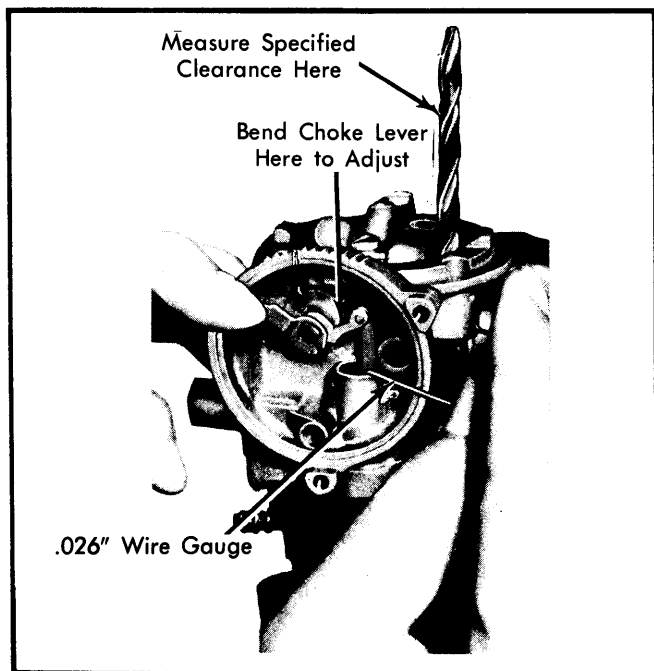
Choke Valve Pull-Down Clearance Adjustment
